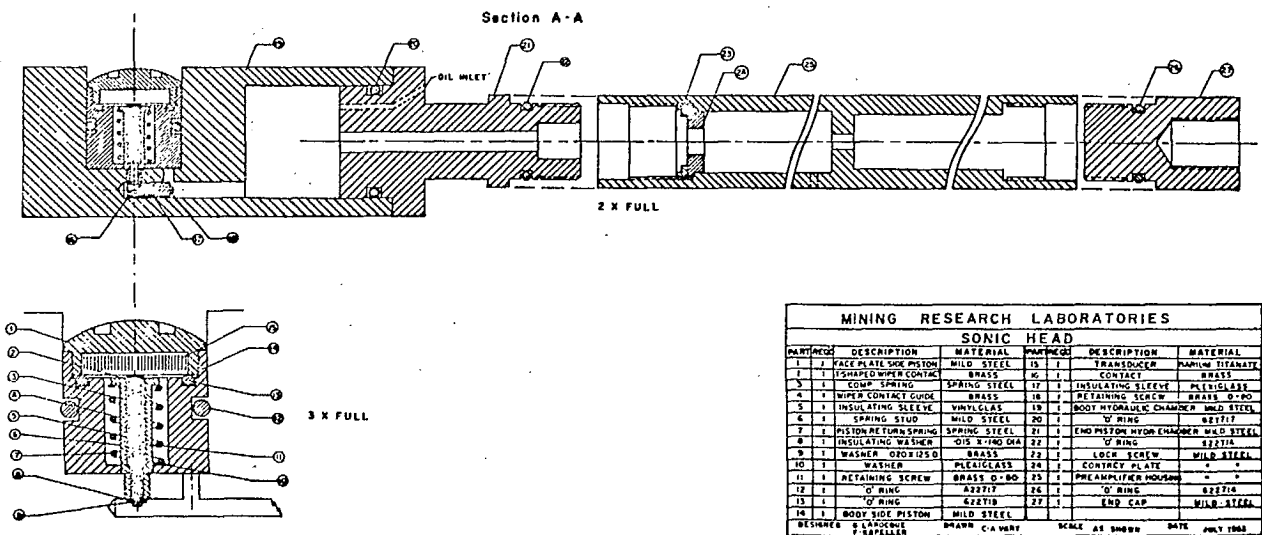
Mechanical Assembly Drawing of Receiving Unit.
